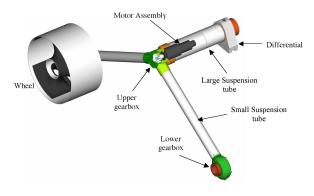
One side of the SR2 drive train. The body and wheel have been removed for clarity.
